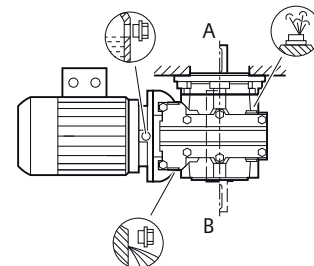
Mounting positions for helical worm gearbox CF flange-mounted design and CAZ housing flange, size 29
